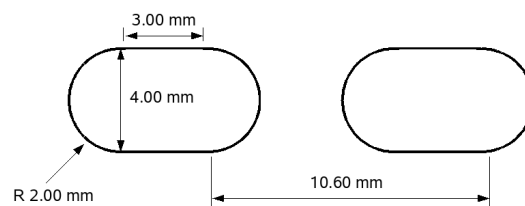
Cross sectional dimensions of oval (racetrack) coolant holes of datum and machined cutback test plates.
